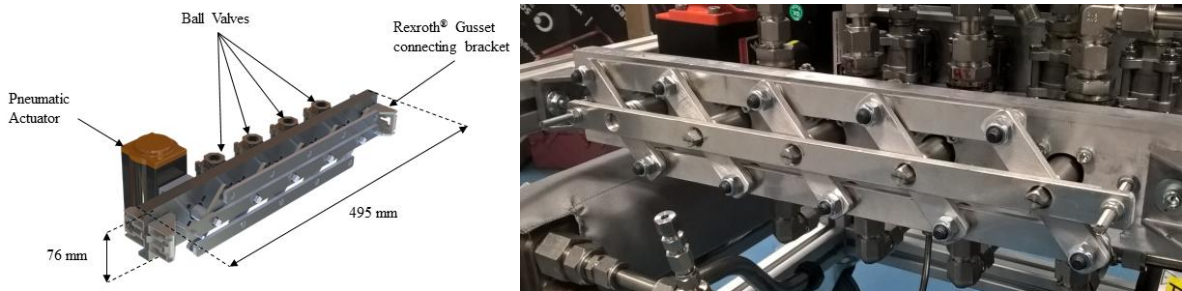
Pneumatically actuated 4-valve sub-assembly a) CAD model representation, b) Constructed sub-assembly fitted into the machine.
